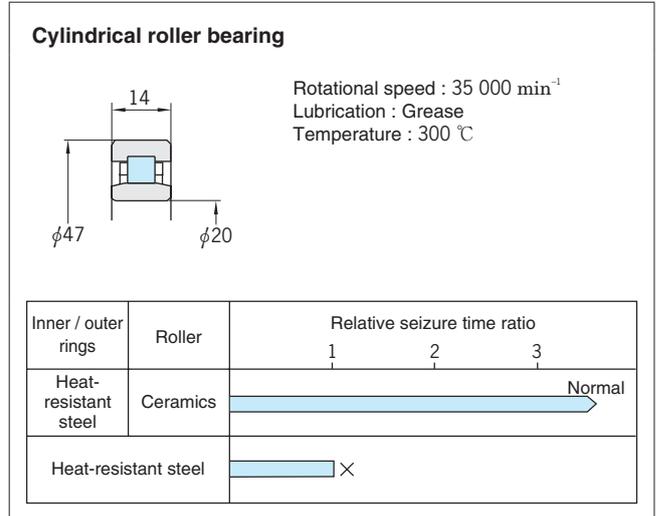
9 Seizure life test results of hybrid ceramic bearings and heat resisting steel bearings
